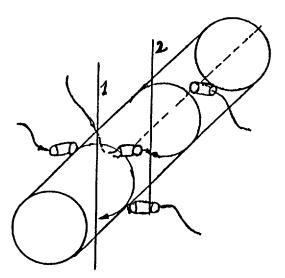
Testing method for longitudinal surface defects on rod material by the immersion technique with two pairs of TR probes.
